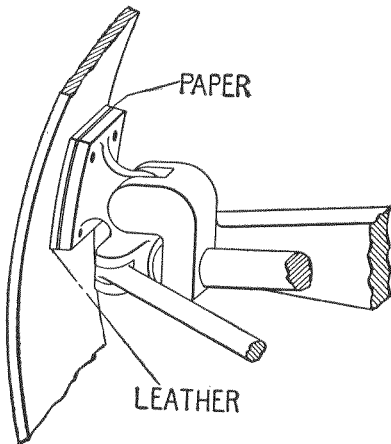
Diagram showing a method of packing out the leathers in the clutch. If these leathers become worn, if the clutch is removed from the machine and a piece of hard manila paper placed underneath the leathers, it will pack them out so that they can be used for a longer period. This packing operation with paper can be renewed several times before the leather is completely worn.
